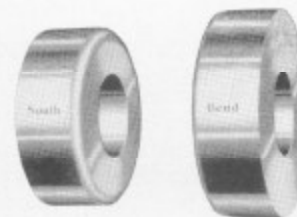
Universal Bearing Adapters to fit Timken and Ball Bearing Cups
